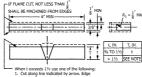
Transverse Face- and Root-Bend Test Specimens
